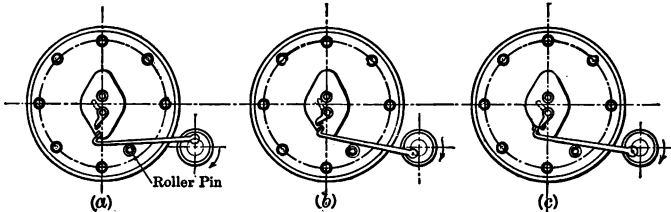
(b).—End View of Cylinder, showing Igniter Block and Operating Mechanism.
